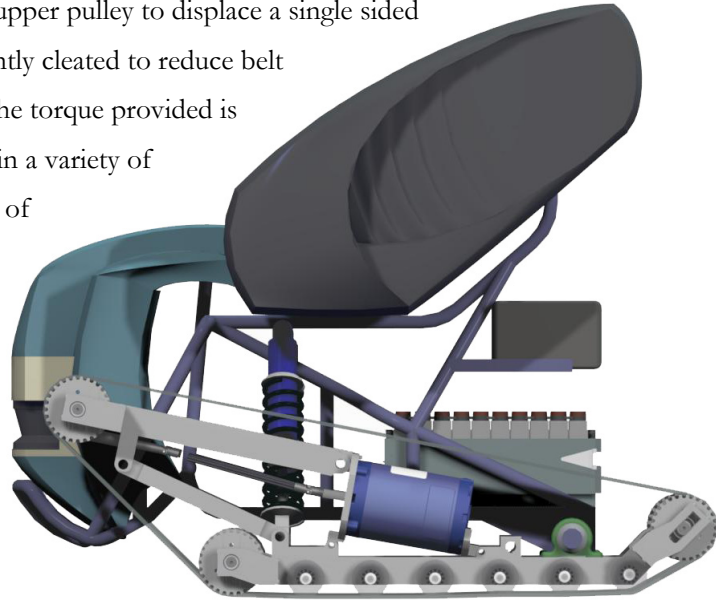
Side view of *Kodiak* showing placement of mechanical components, batteries, laser range scanner, and power box.
